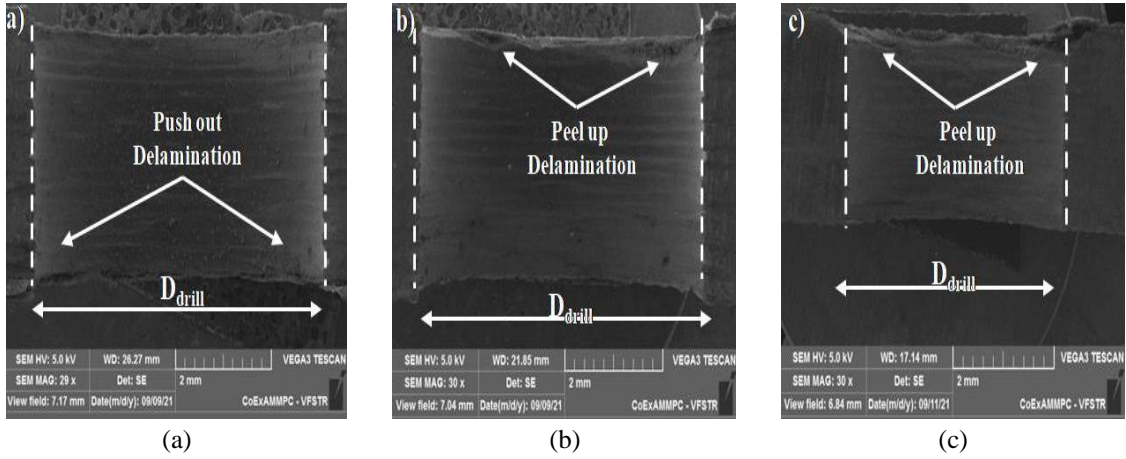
Sectional view of CFRP drilled with different drills (a) Brad point (b) Dagger (c) Twist
